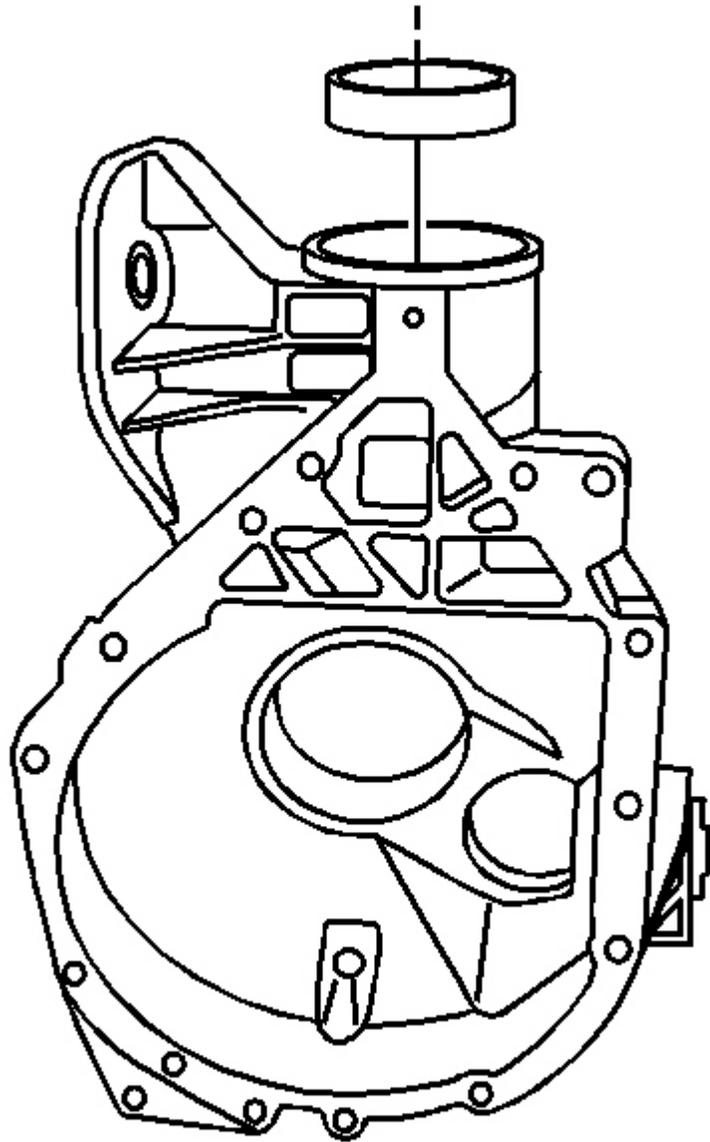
Installing Outer Pinion Bearing Cup Into Outer Pinion Bearing Cup Bore
